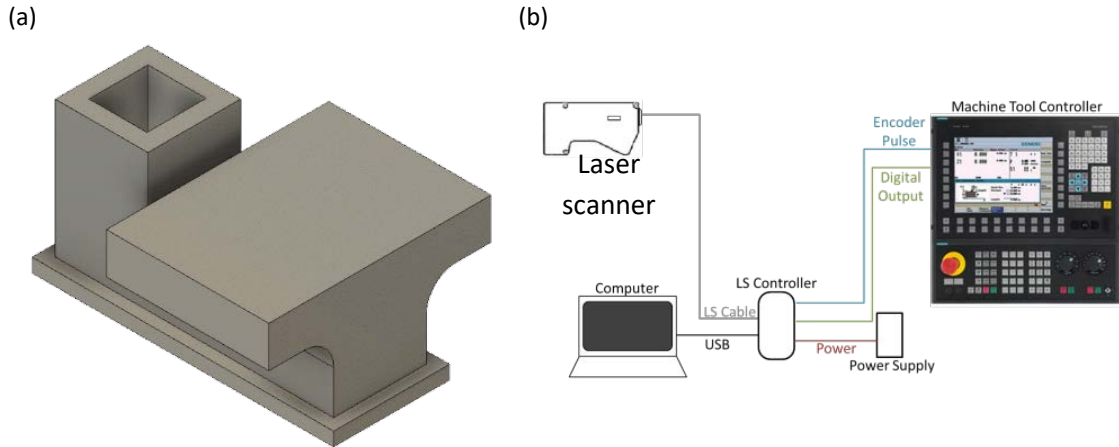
(a) Nominal model of the raw casting; (b) Schematic of using machine tool to move laser scanner and collect data
